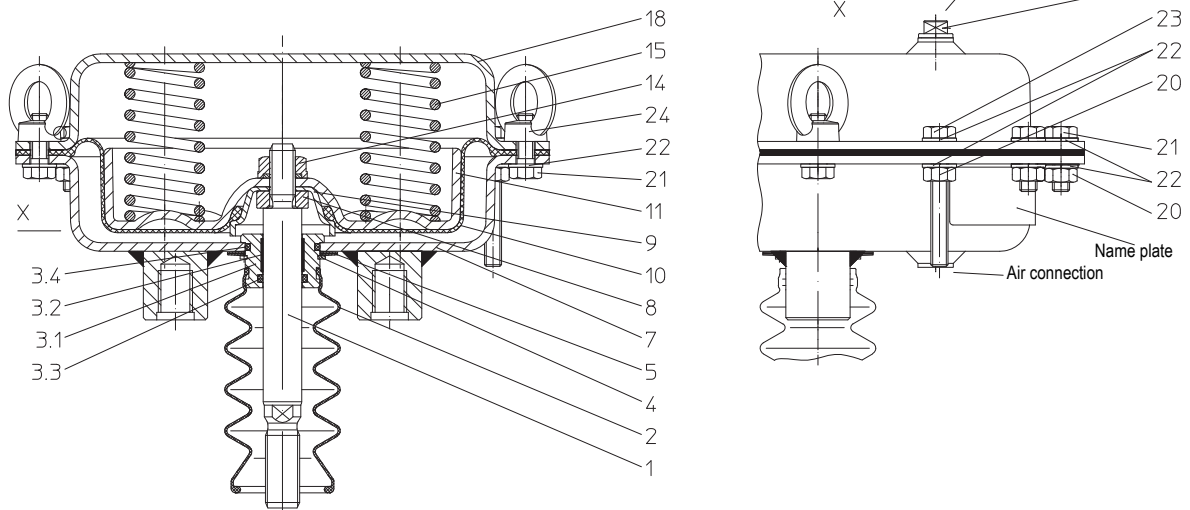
DP30 / DP32 „actuator stem extends by spring force“
